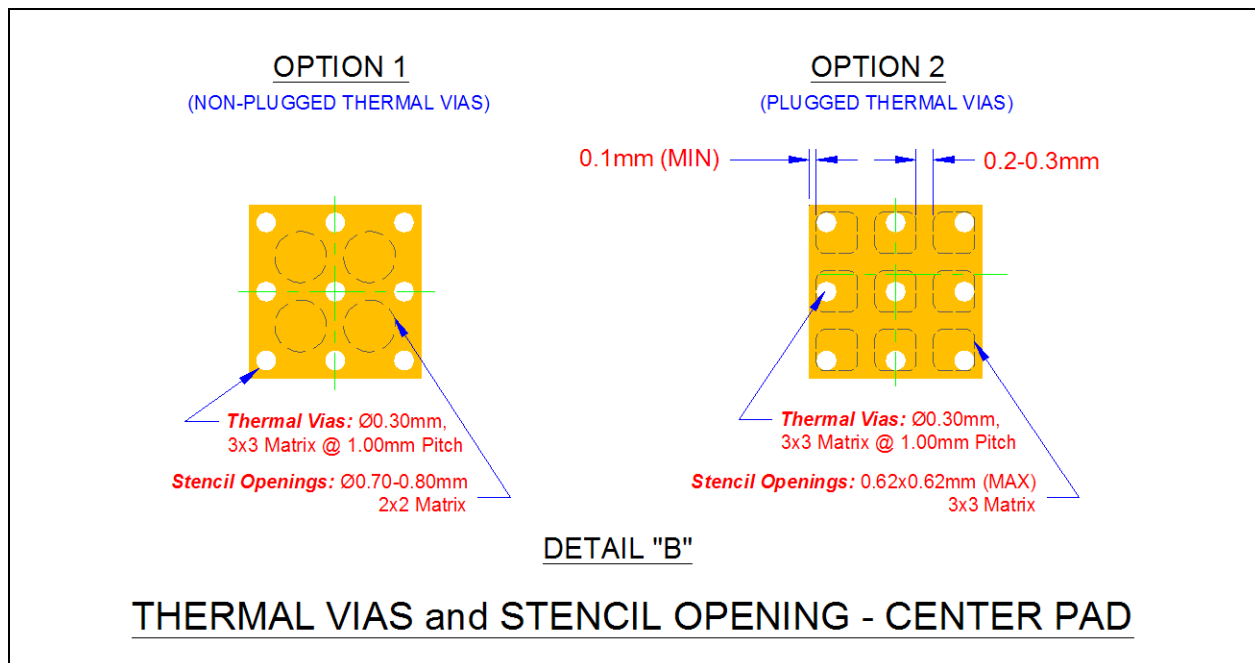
CAP1188 PCB Detail B - 24-Pin QFN 4mm x 4mm
